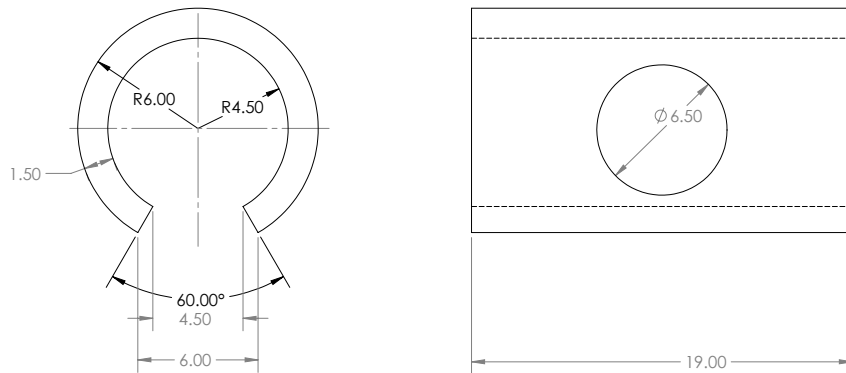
Dimensions, in millimeters, of the C-ring specimen.
